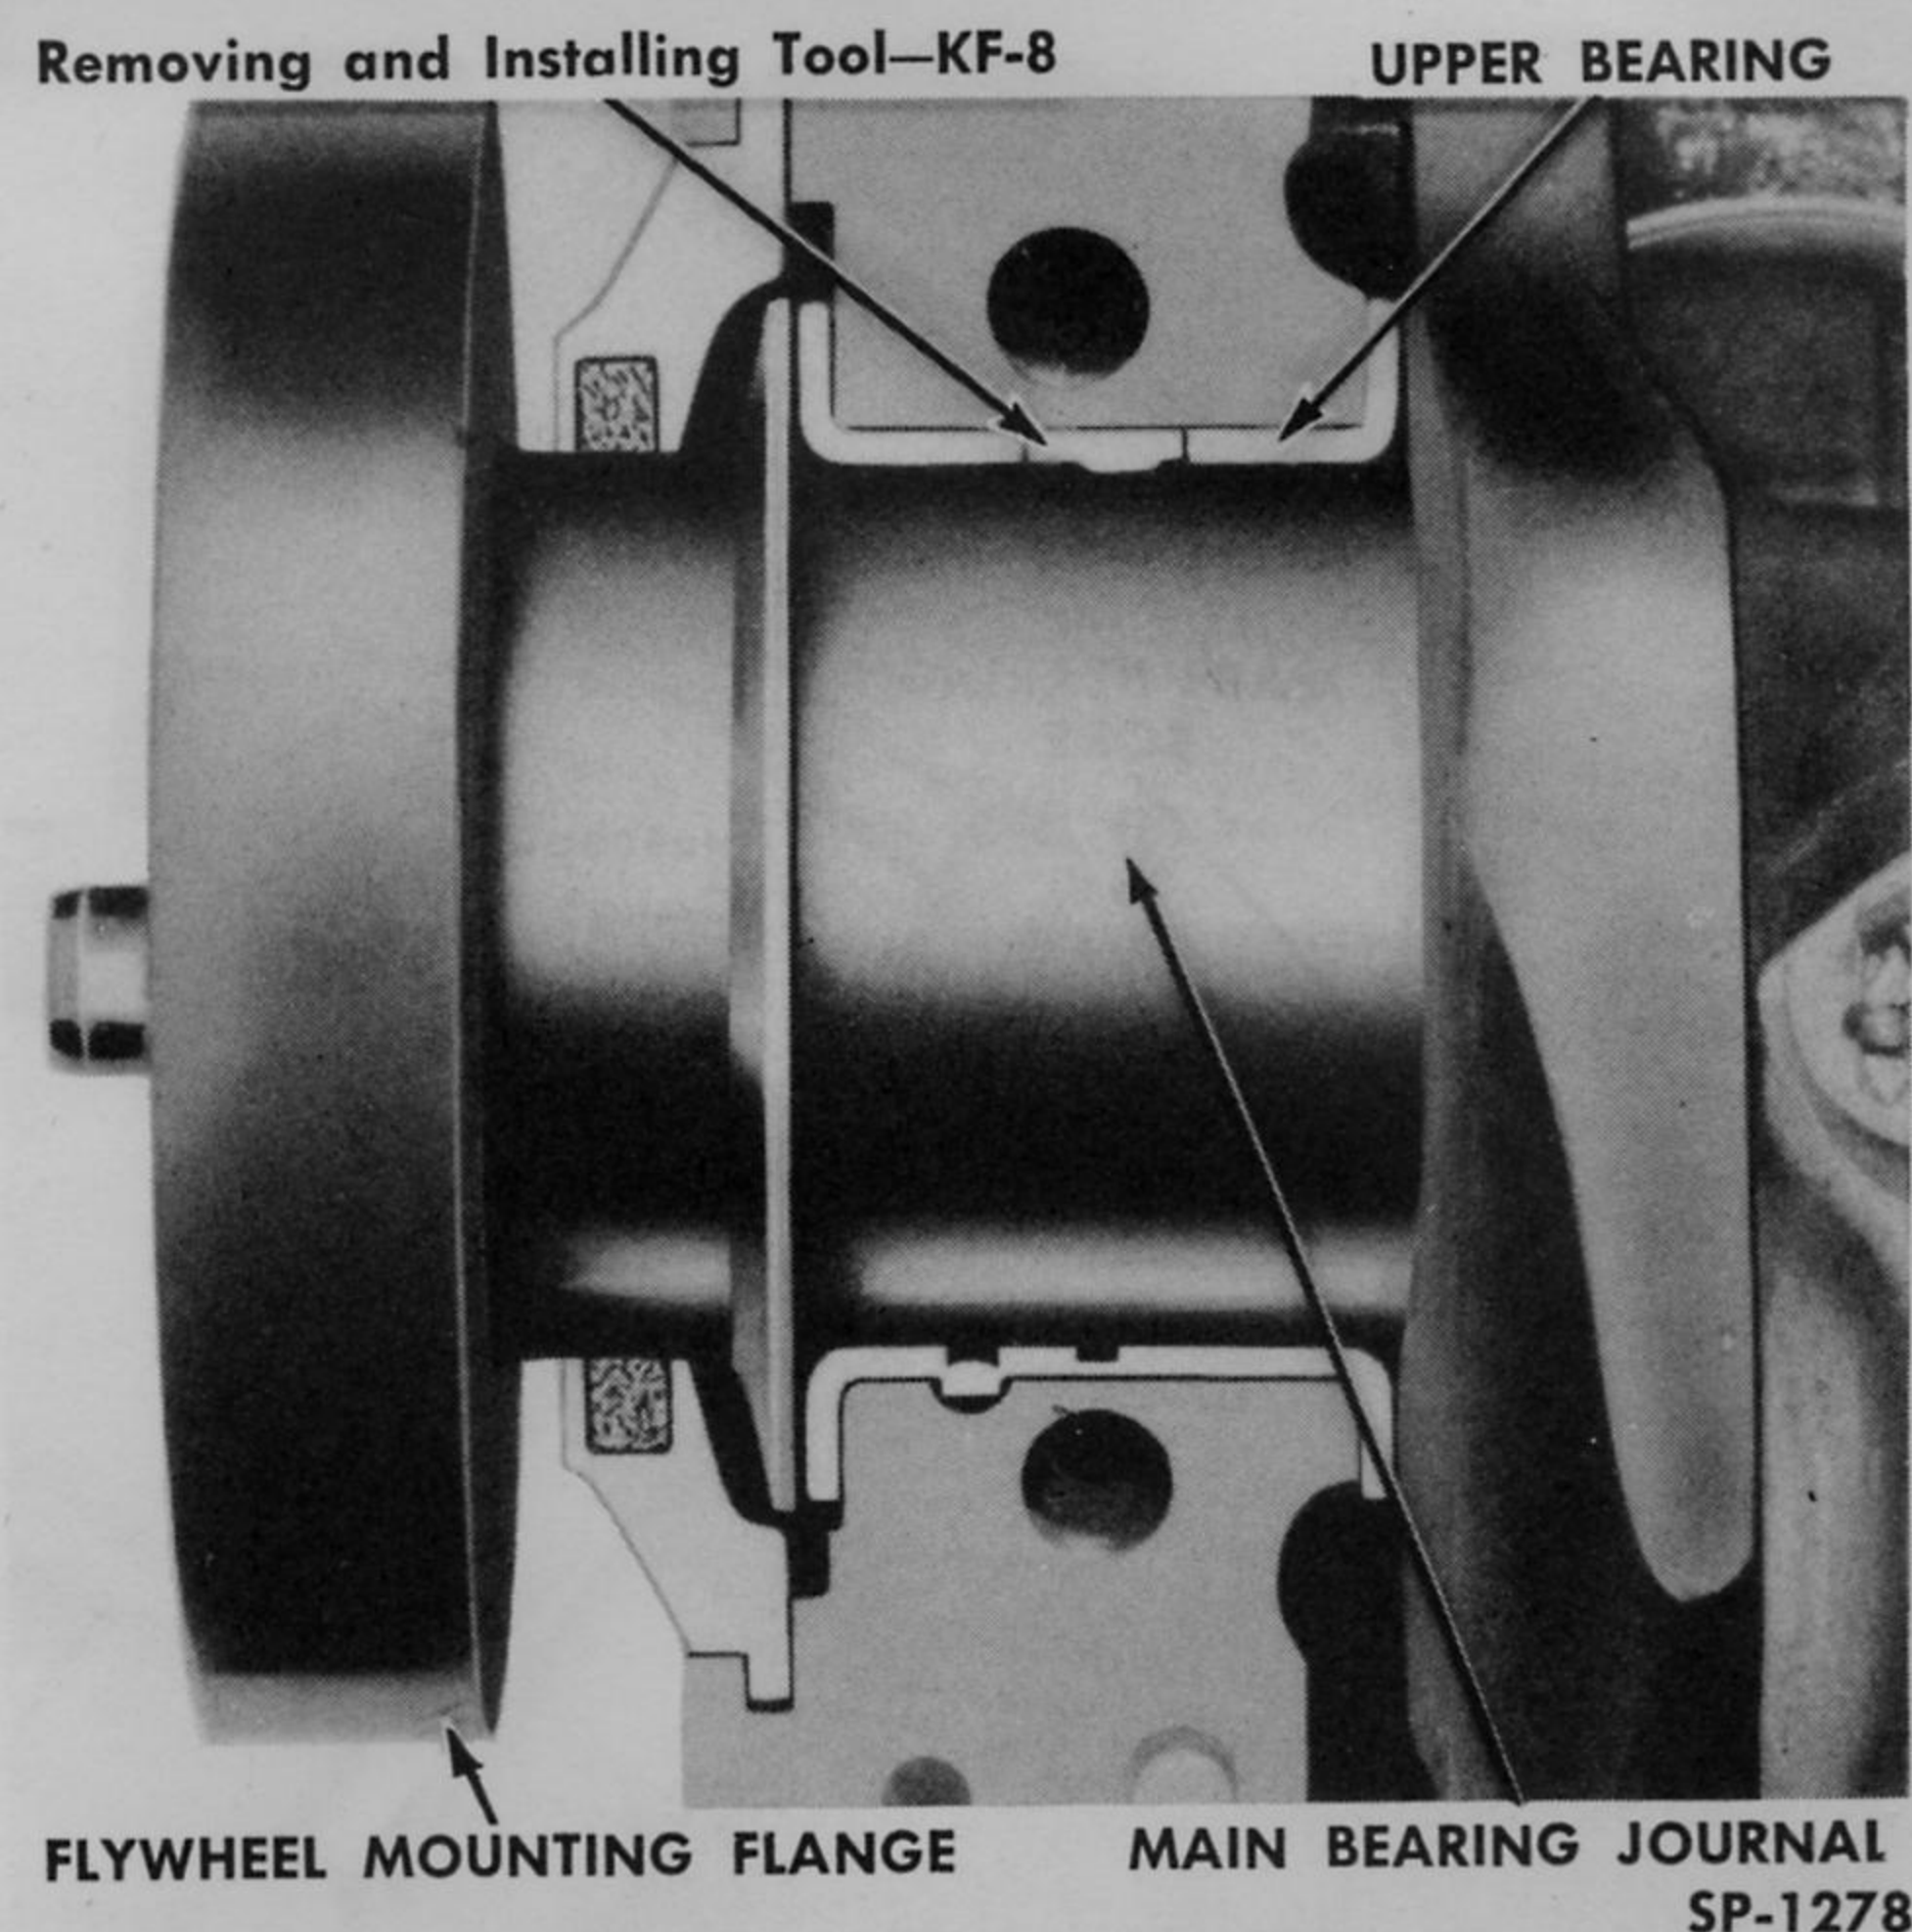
Removing Main Bearing Upper Half with Engine Installed
